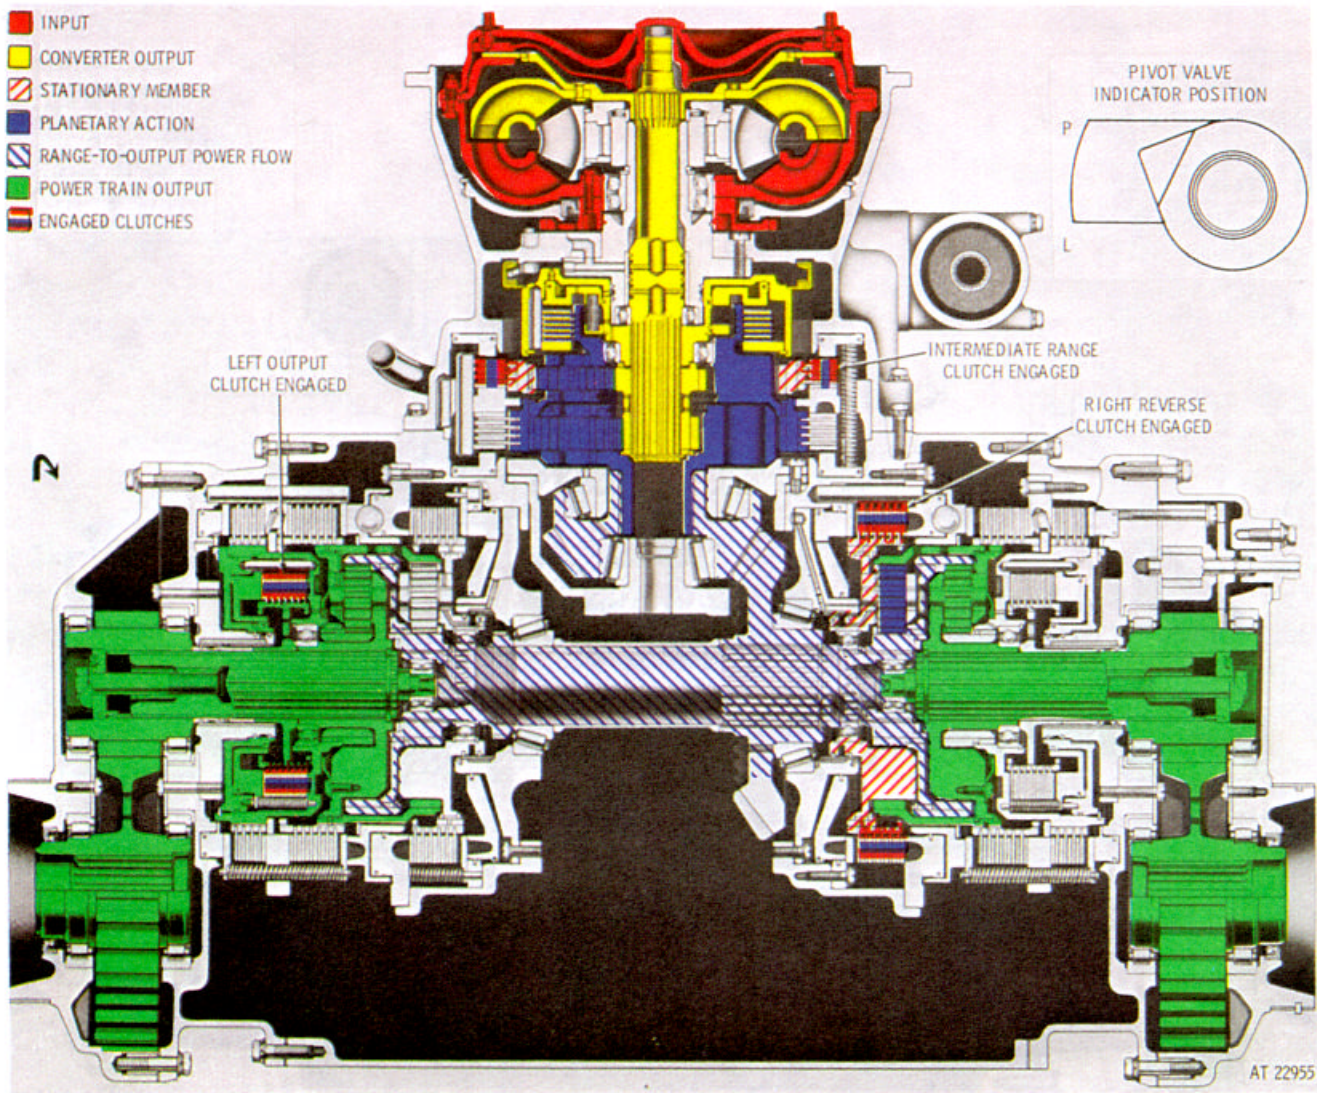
Third gear, pivot right steer operation-torque path.
